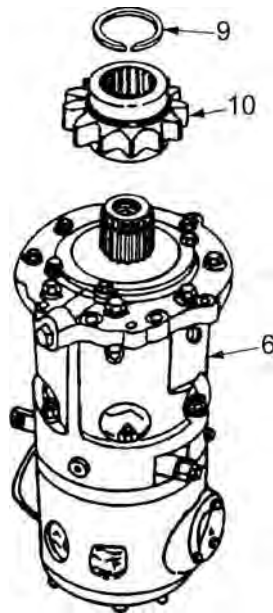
13-Tooth Hydrostatic Drive Gear Removal.
